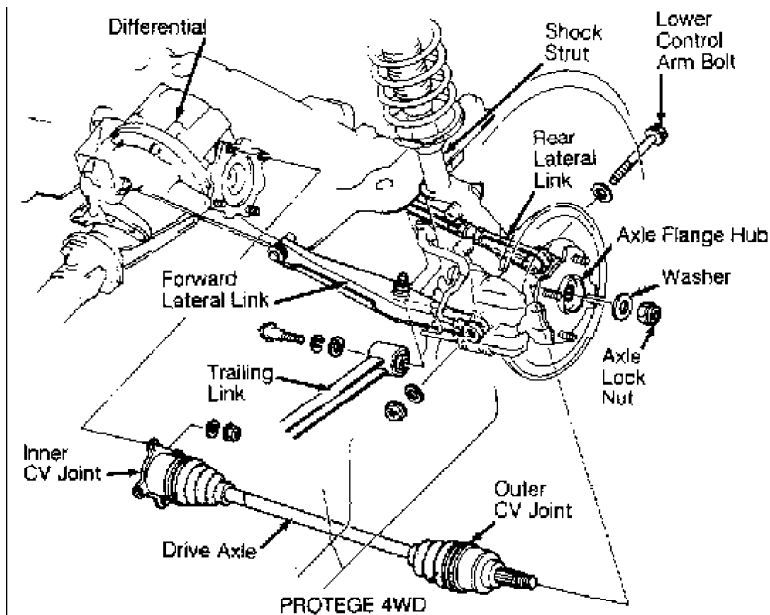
Removing Rear Drive Axle (Protege 4WD)
